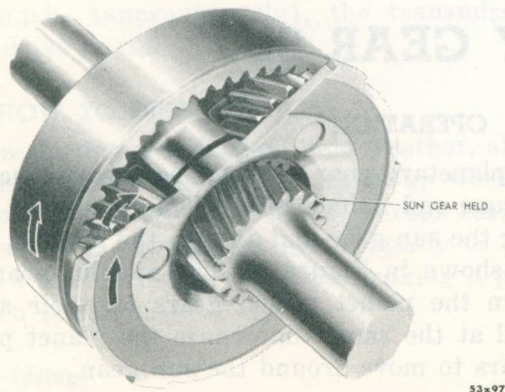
Planetary Gear Set (Sun Gear Held)—Gear Reduction
